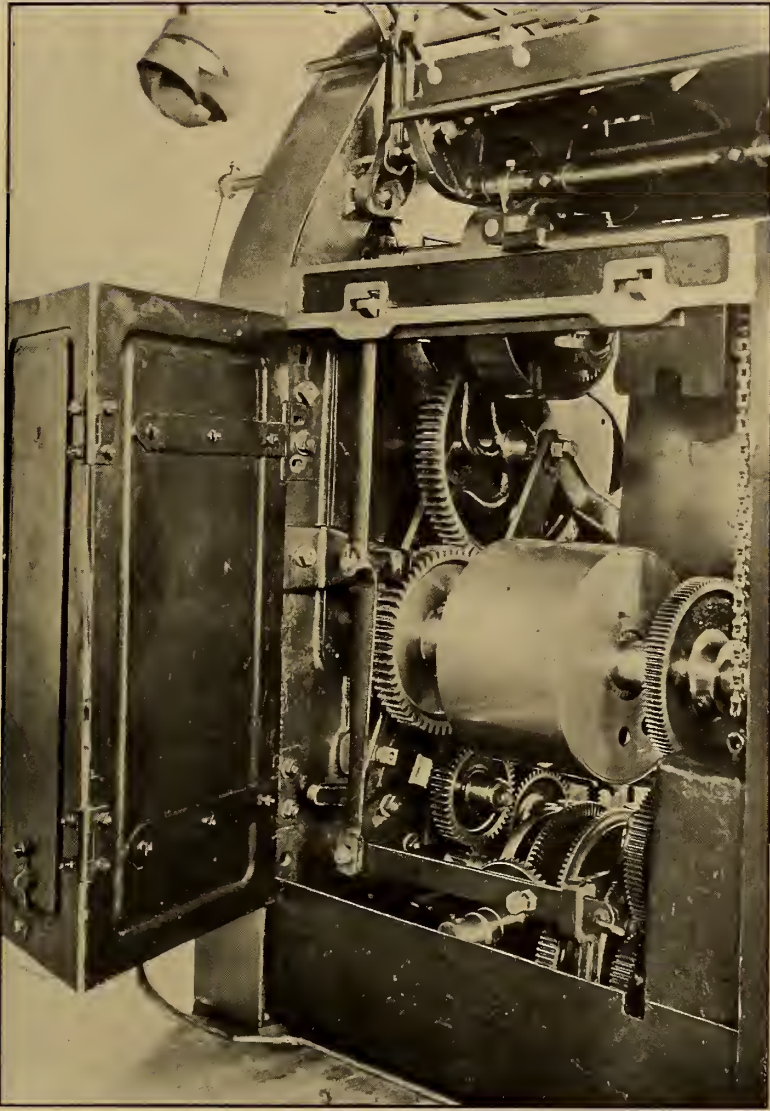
SAFETY-LOCKING DOOR OF HEADSTOCK GEARING OF SPEED FRAME
